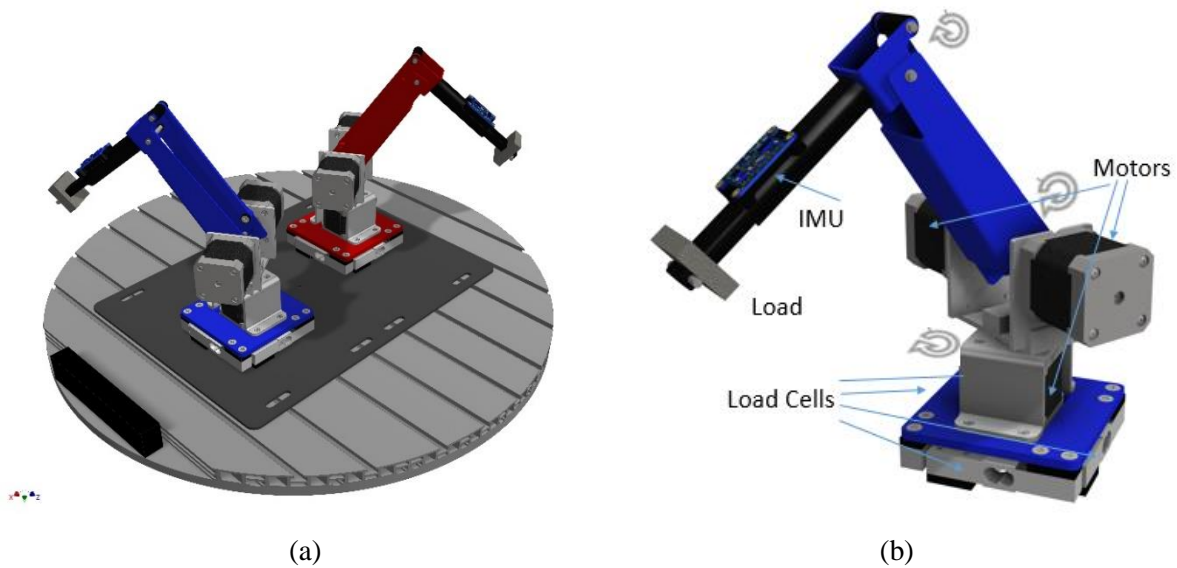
Mechanical CAD design of the prototype: (a) complete system on the centrifuge plate. (b) Single arm detail.
